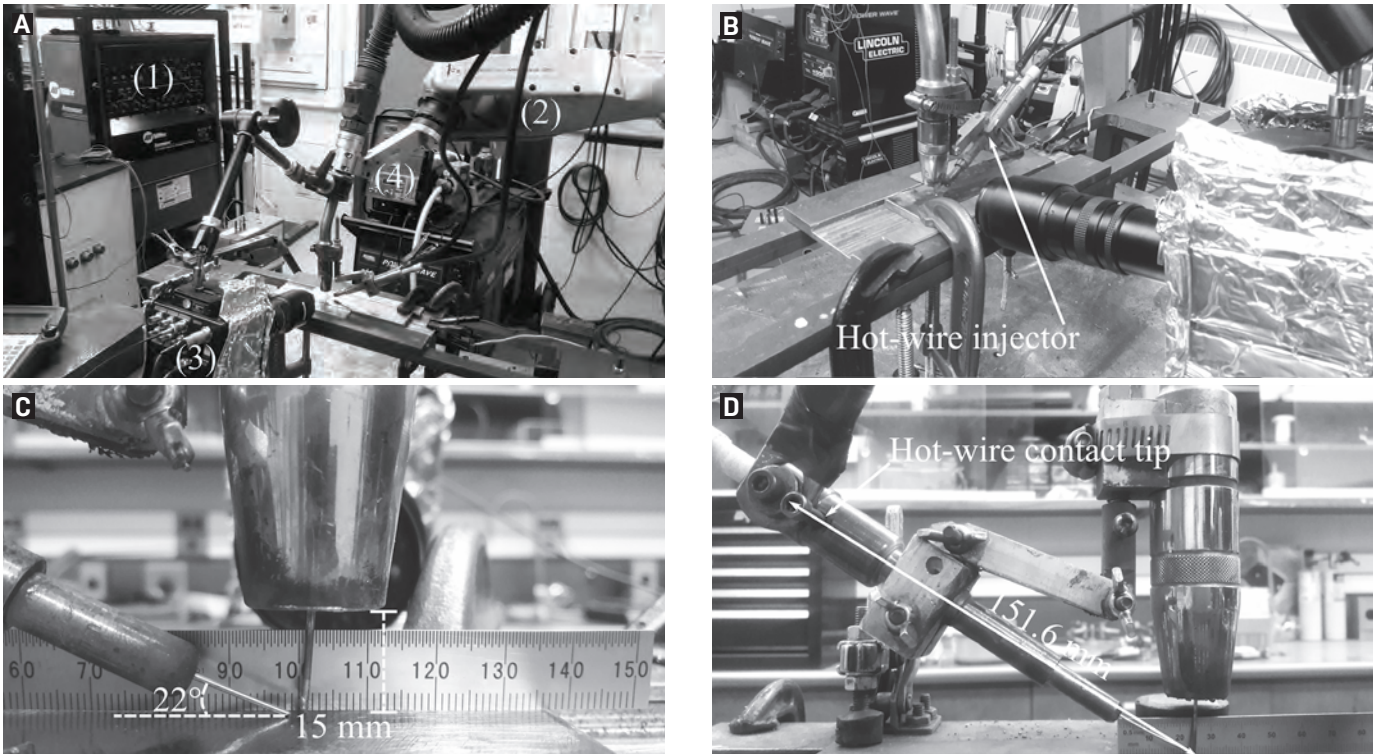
Experimental set-up: A — General view with numbers indicating (1) hot-wire power source, (2) FANUC robotic arm, (3) high-speed camera, and (4) hot-wire feeder; B — detail showing the hot-wire injector; C — detail showing CTWD (mm) and hot-wire angle; D — the distance of the contact tip to the weld pool.
